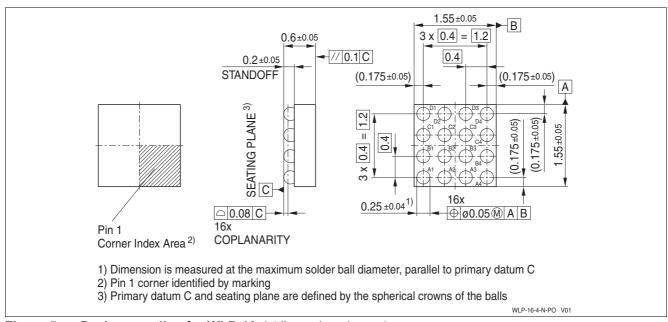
Package outline for WLP-16-4 (dimensions in mm)
